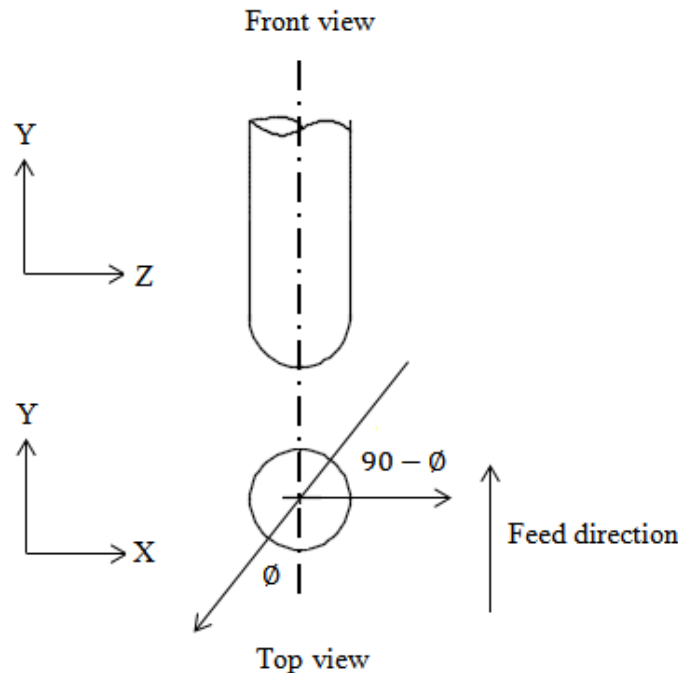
Demonstration of cutting edge element rotation angle, ϕ with proper feed direction
